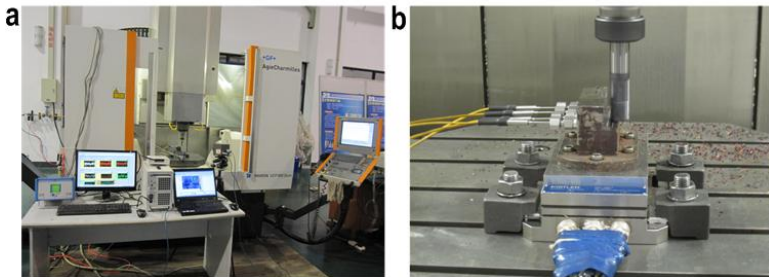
Milling experiments setup. (a) Image of settings; (b) Detail view of test piece.
